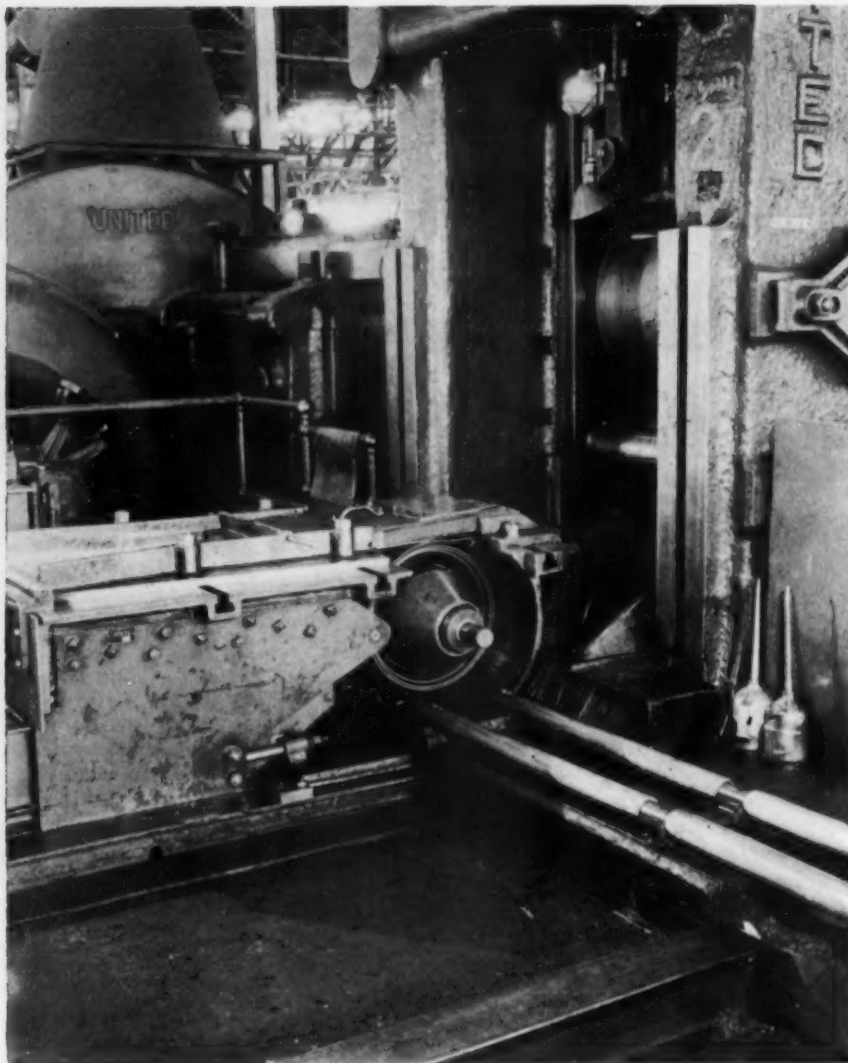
The carriage of the coil sticking machine is next advanced, entering the coil end into the rolls for the second pass.
